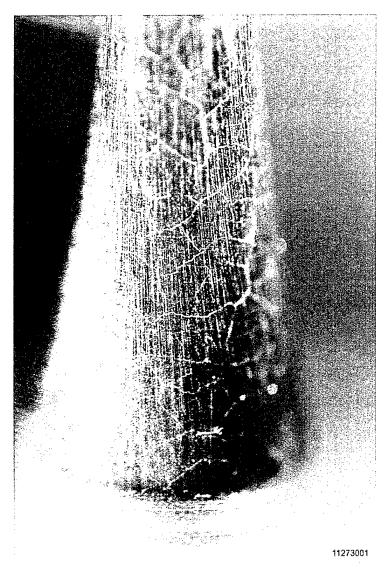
White Light of EHC Coated Specimen Showing Cracks Created By Machining Process
